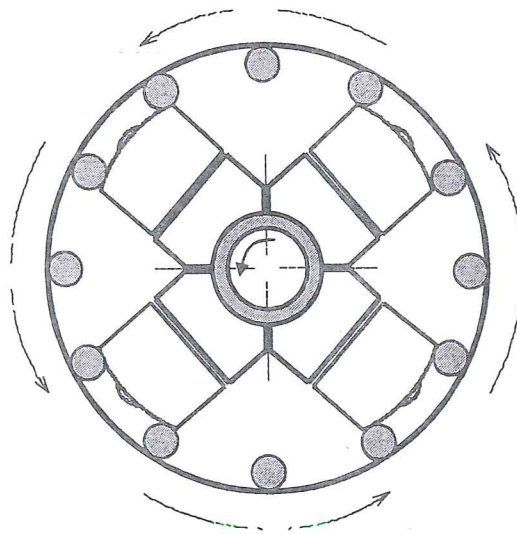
Hammer system of a forging machine (from Wang *et al.* 1995).
